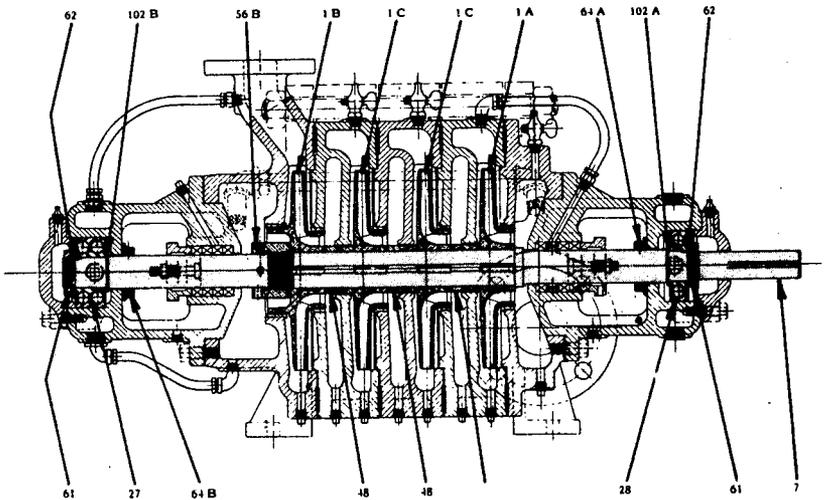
Cross Section of Pump Showing Rotor Assembly
